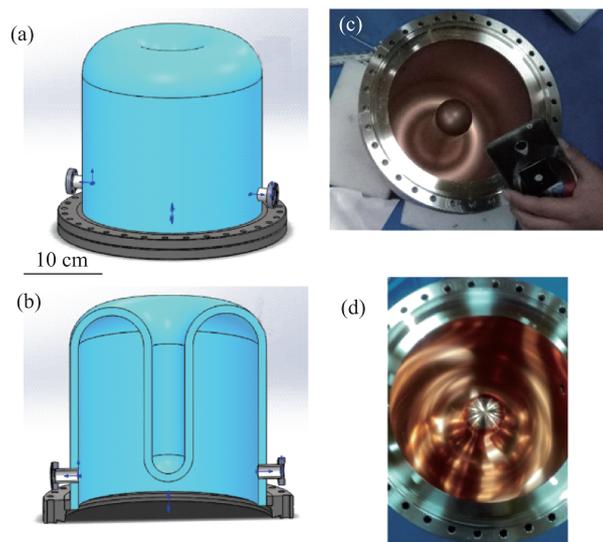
(color online) Dummy cavity preparation and polishing. (a) 3D model of the dummy QWR cavity. (b) The cut-out view which shows the inner structure of the cavity. (c) A rough surface after the 2nd mechanical polishing step. (d) A mirror shining surface after the final mechanical polishing step.
